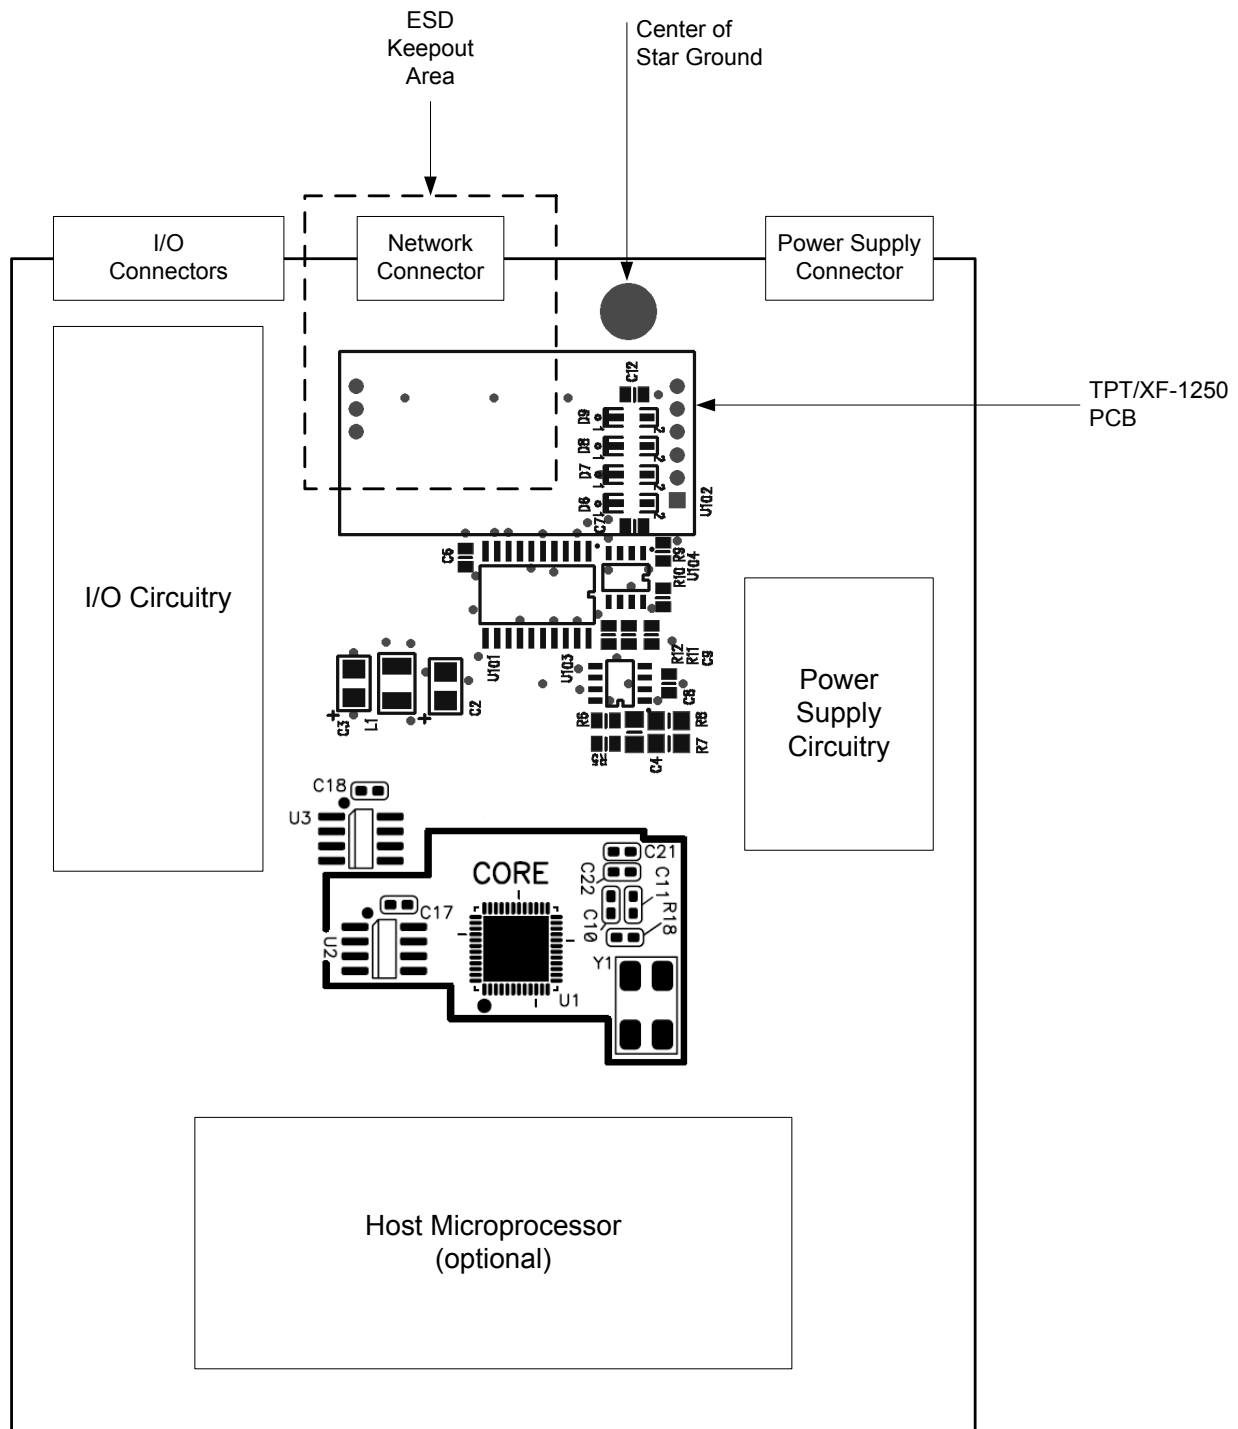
Example PCB Layout for a Neuron 5000 Processor with a TPT/XF-1250 Transceiver
